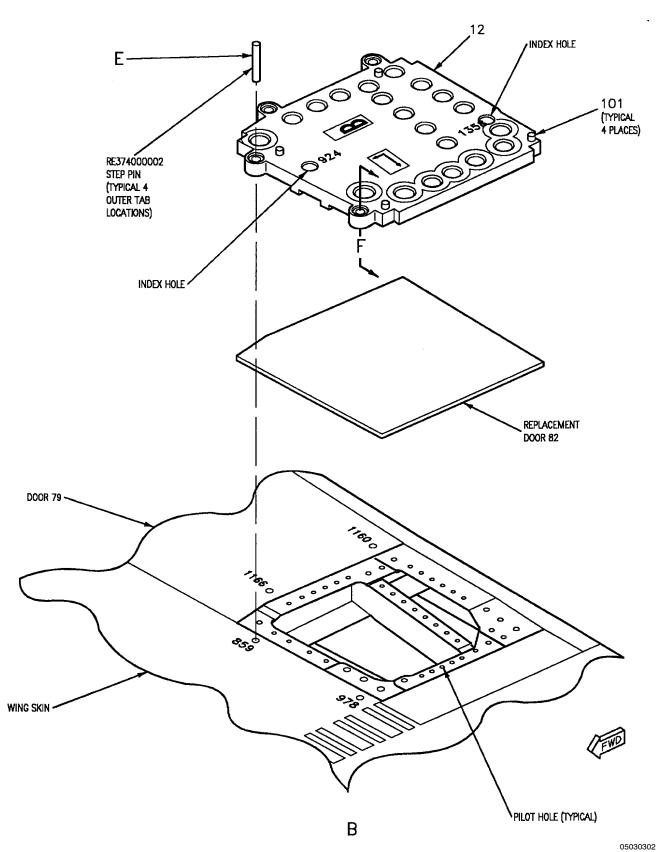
Installation of Plate Set for Drilling Door 82 and Substructure (Sheet 2)
